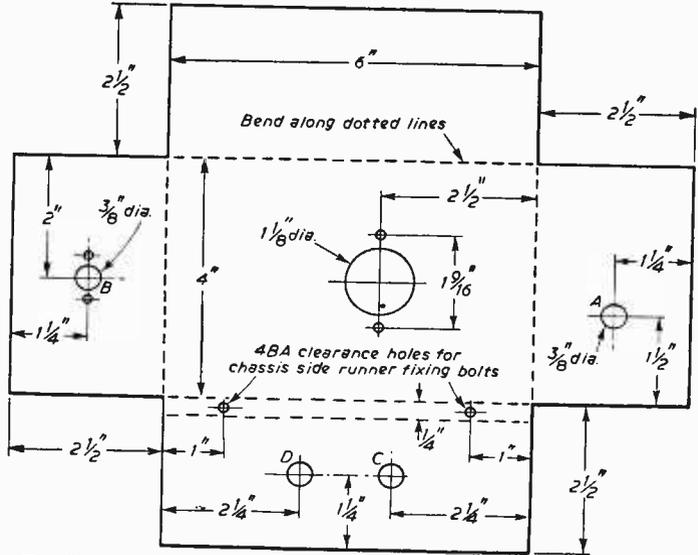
Additional chassis to be bolted to that of the "Coronet."
